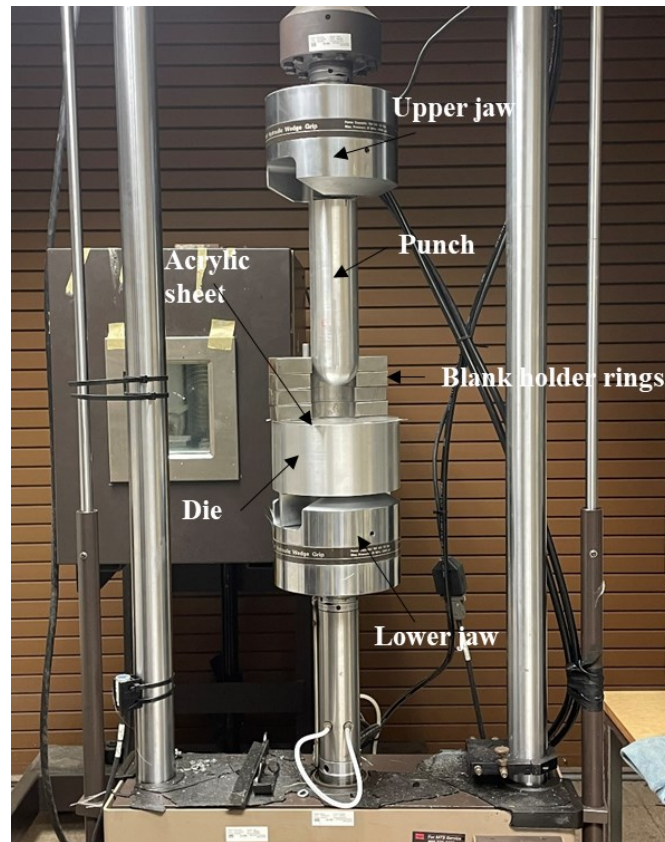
Experimental press forming setup for dry fabrics installed on an MTS machine. (Note: Only half of the blank holder rings are shown in the figure).
